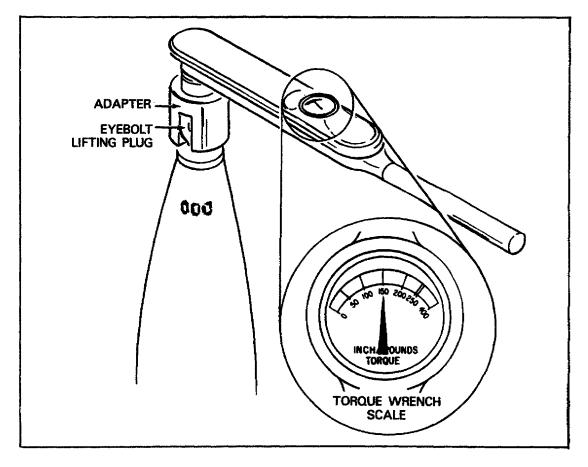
Torquing the Eyebolt Lifting Plug.
